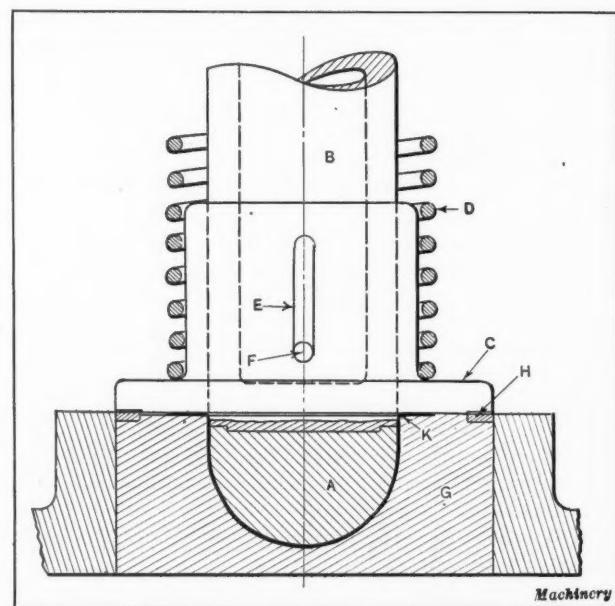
Die equipped with a Blank-holder, which is used in the First Drawing Operation performed on the Tank Sections illustrated at A in Fig. 1
